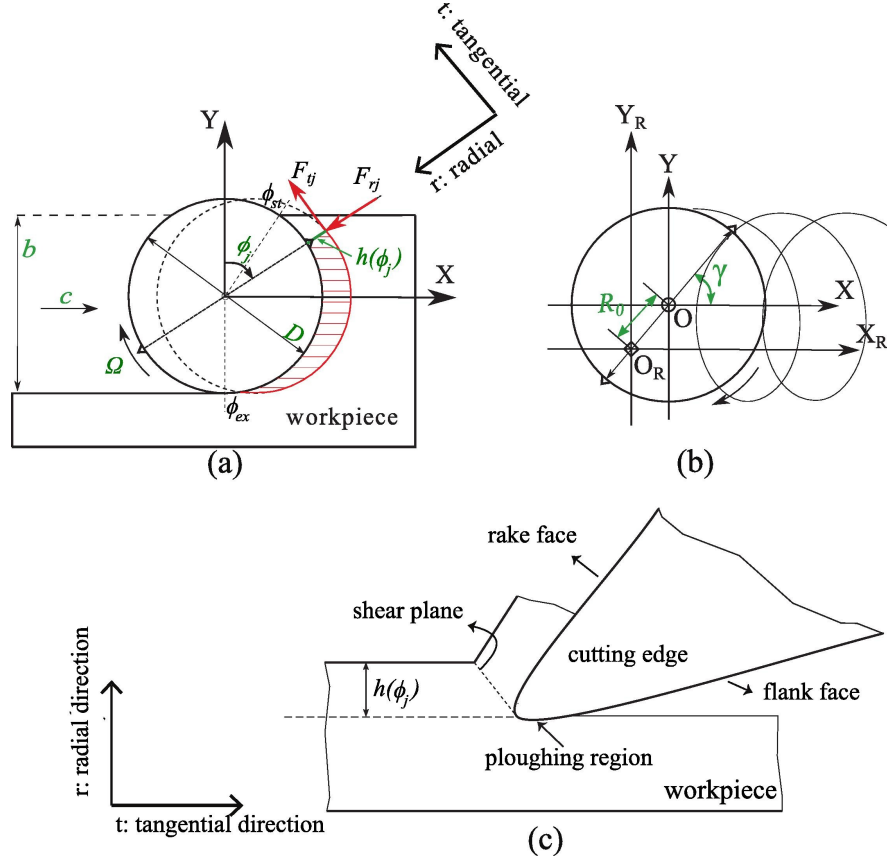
(a) Geometry of milling process; (b) Tool radial runout parameters and trochoidal trajectory; (c) Interaction of the cutting tool and workpiece material on the rake and flank faces of the cutting edge
